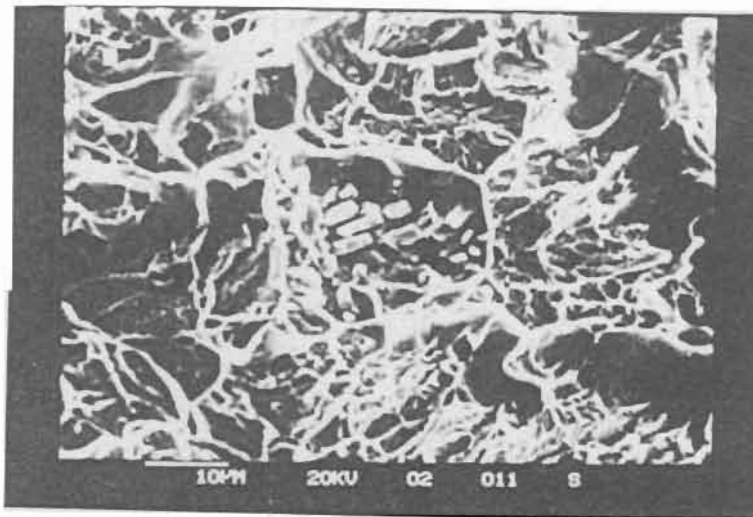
Fractograph of the forging crack. Shows disintegration of a particle cluster into several platelets within a dimple. Matrix is ductile.
